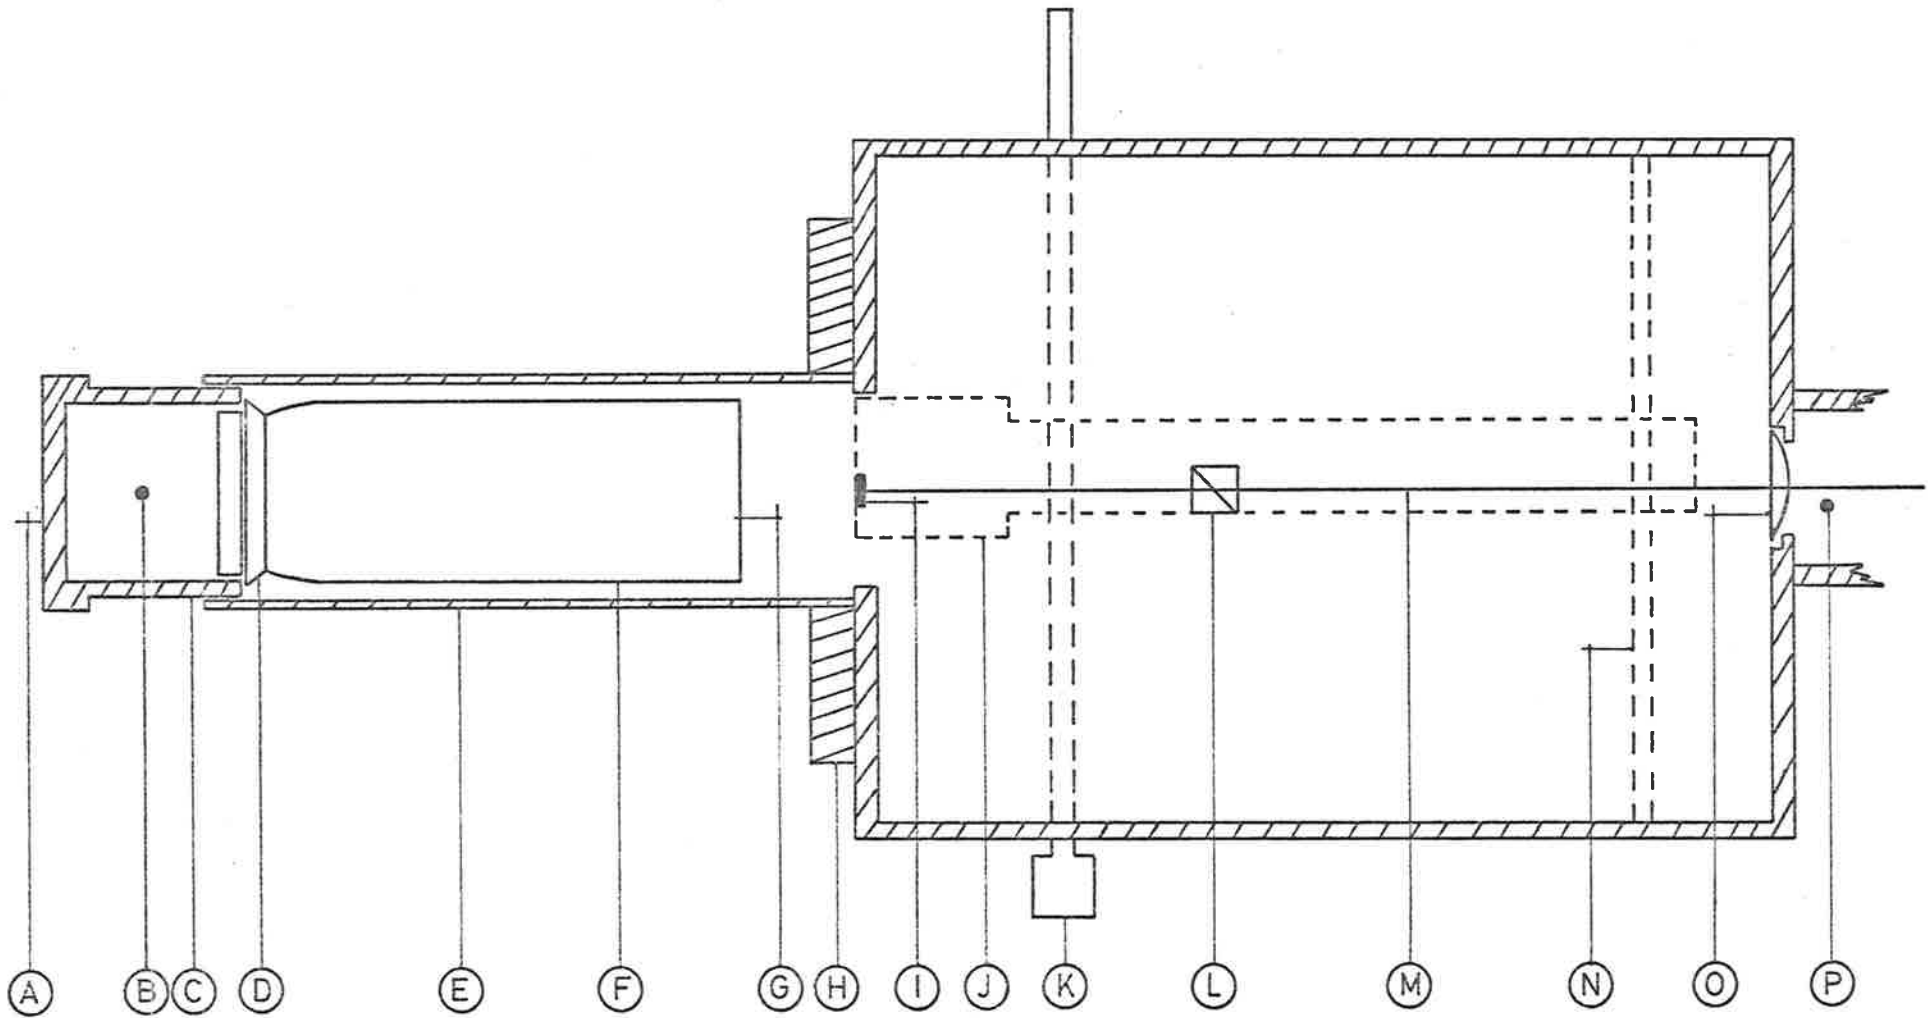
FILM TRANSMITTANCE ATTACHMENT — HORIZONTAL SECTION THROUGH OPTIC AXIS — HALF FULL SIZE
